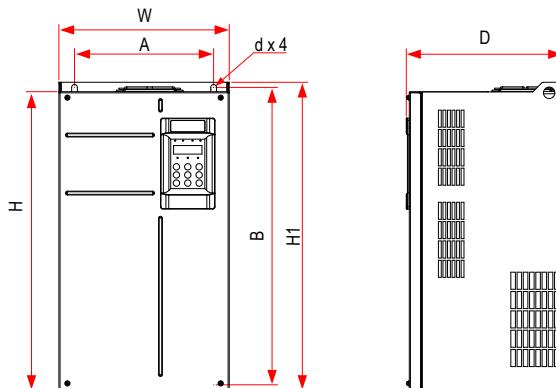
Outline dimensions and installation dimensions of 45-160 kW AC drive models
